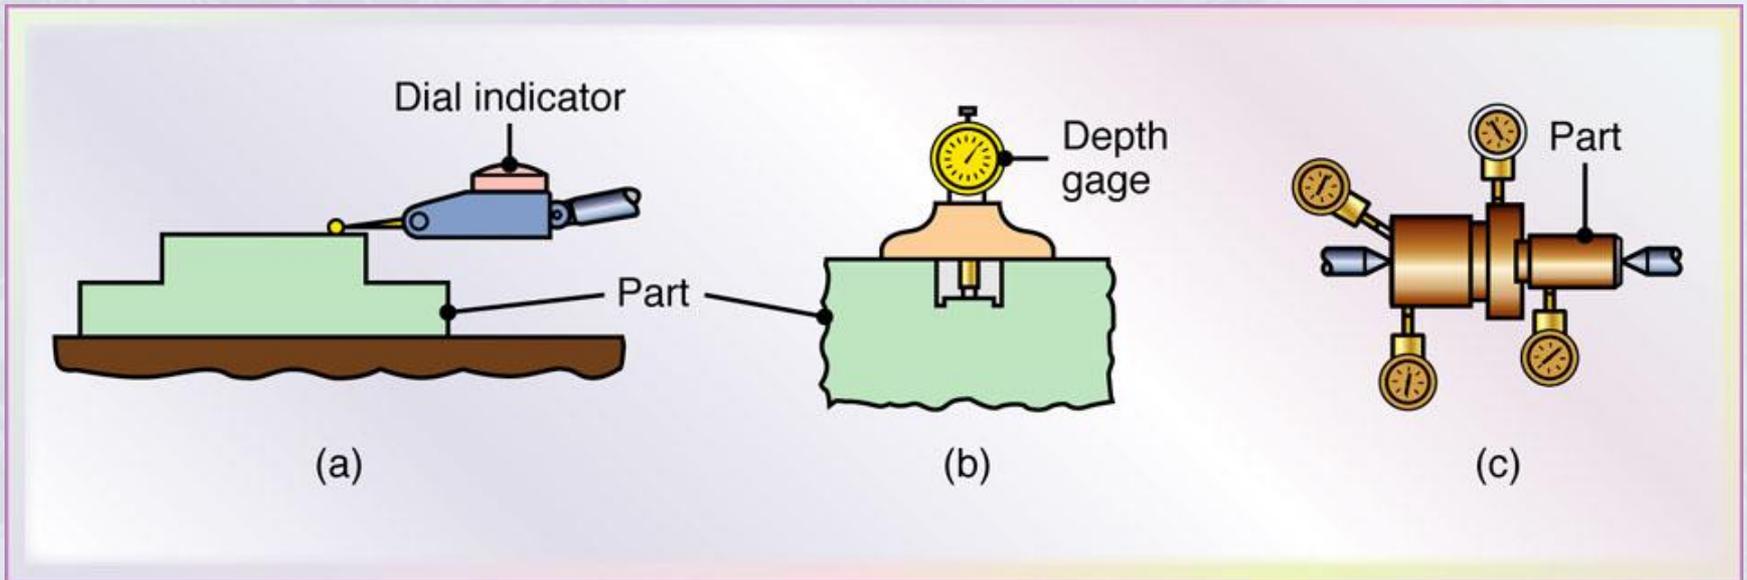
Three uses of dial indicators: (a) roundness, (b) depth, and (c) multiple-dimension gaging of a part.
